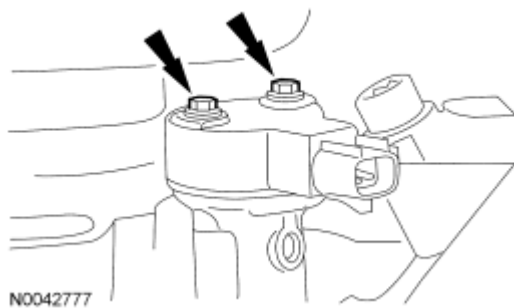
Locating Camshaft Position (CMP) Sensor Bolts
